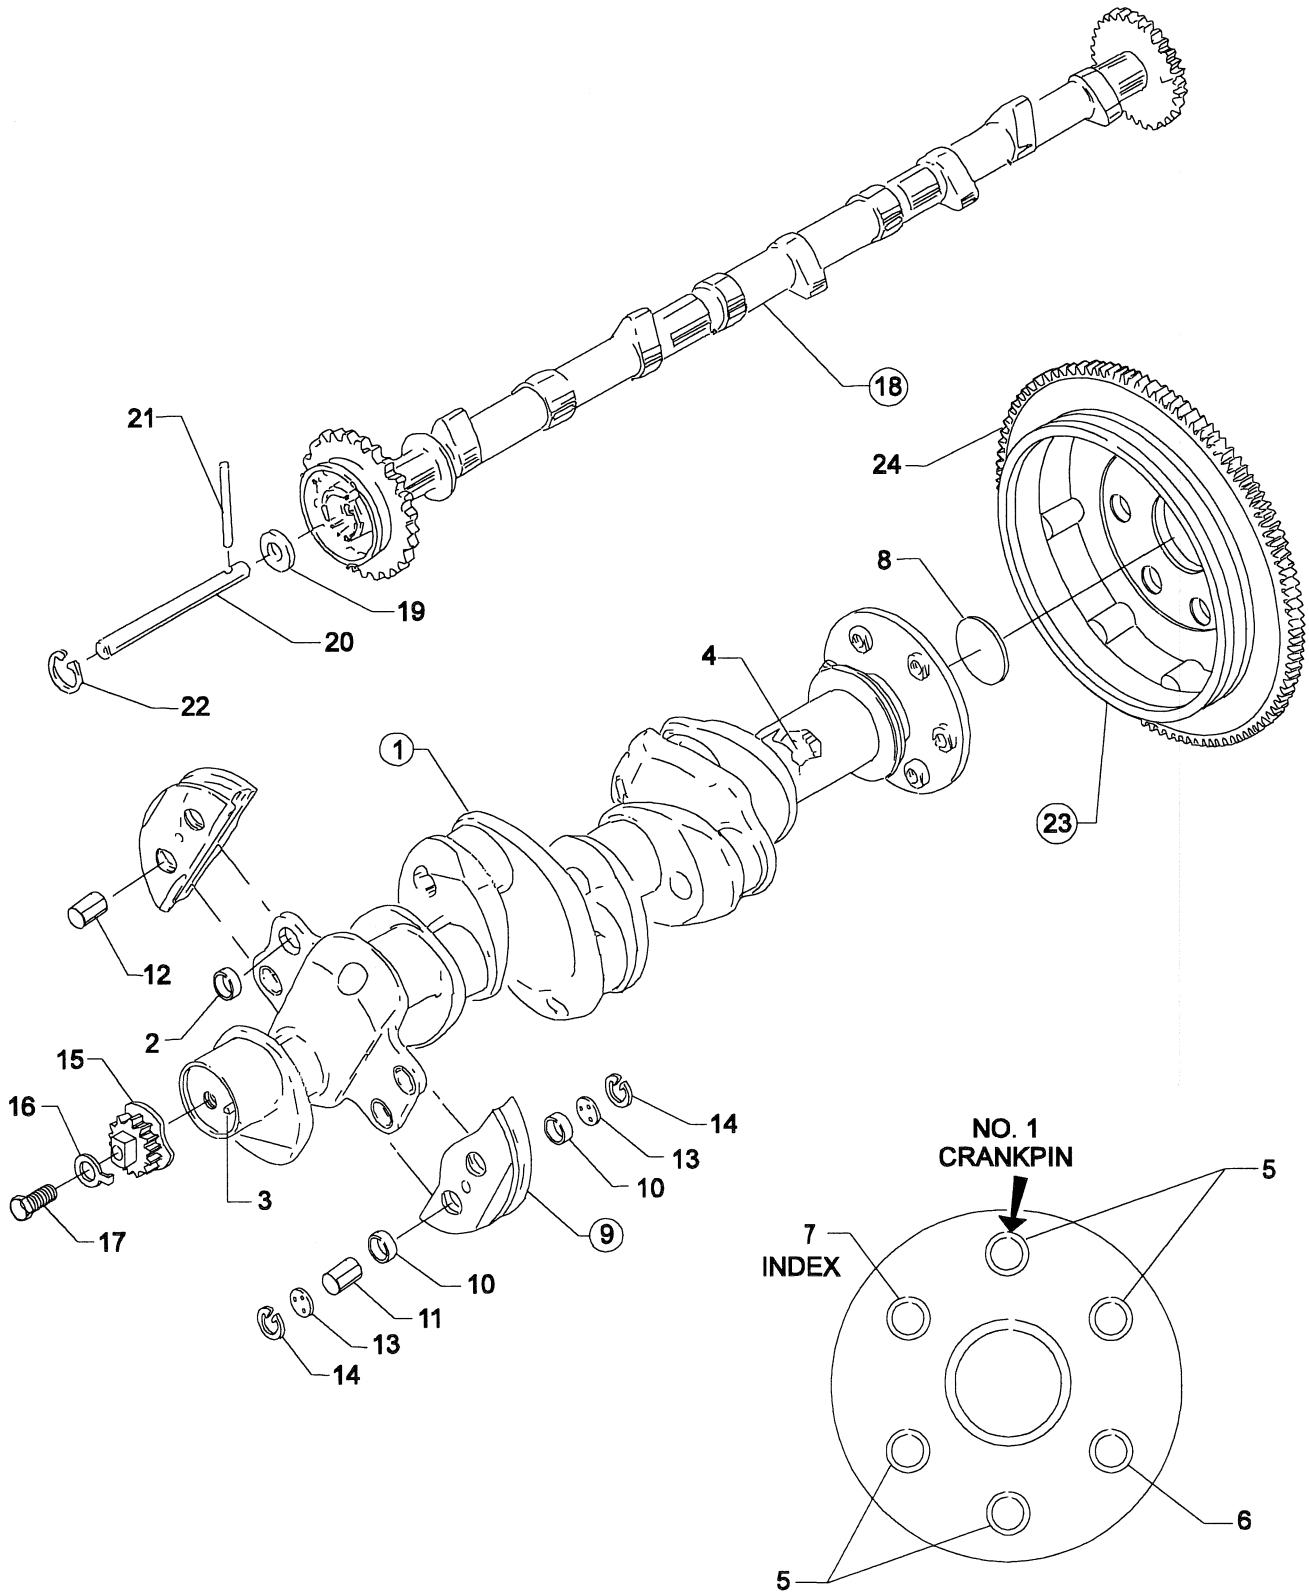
CAMSHAFT, CRANKSHAFT AND RELATED PARTS
